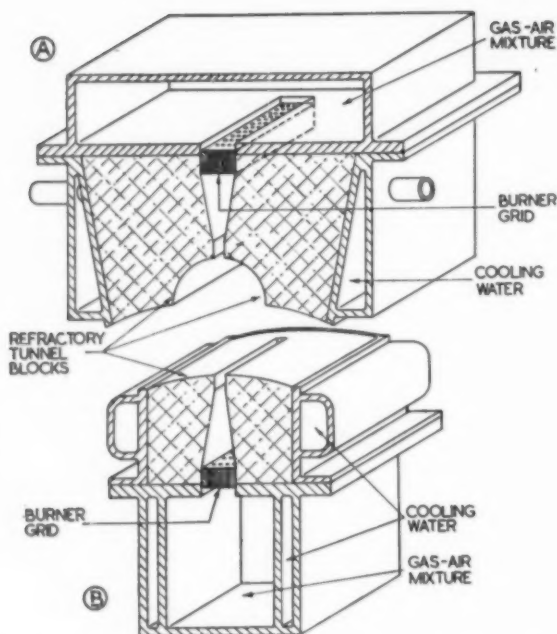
Jet burners for heating tube prior to roller welding operation: A—external burner; B—Internal burner.
